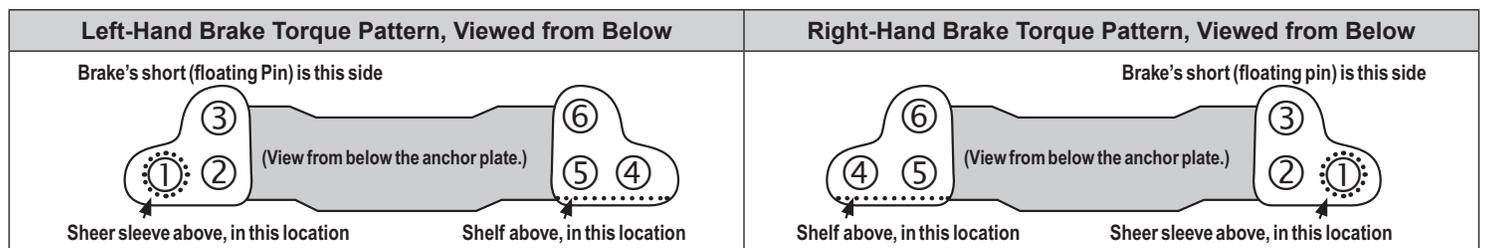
Torque Pattern To Use When Installing Vertical Mount Bendix ADB22X Brake Assembly
